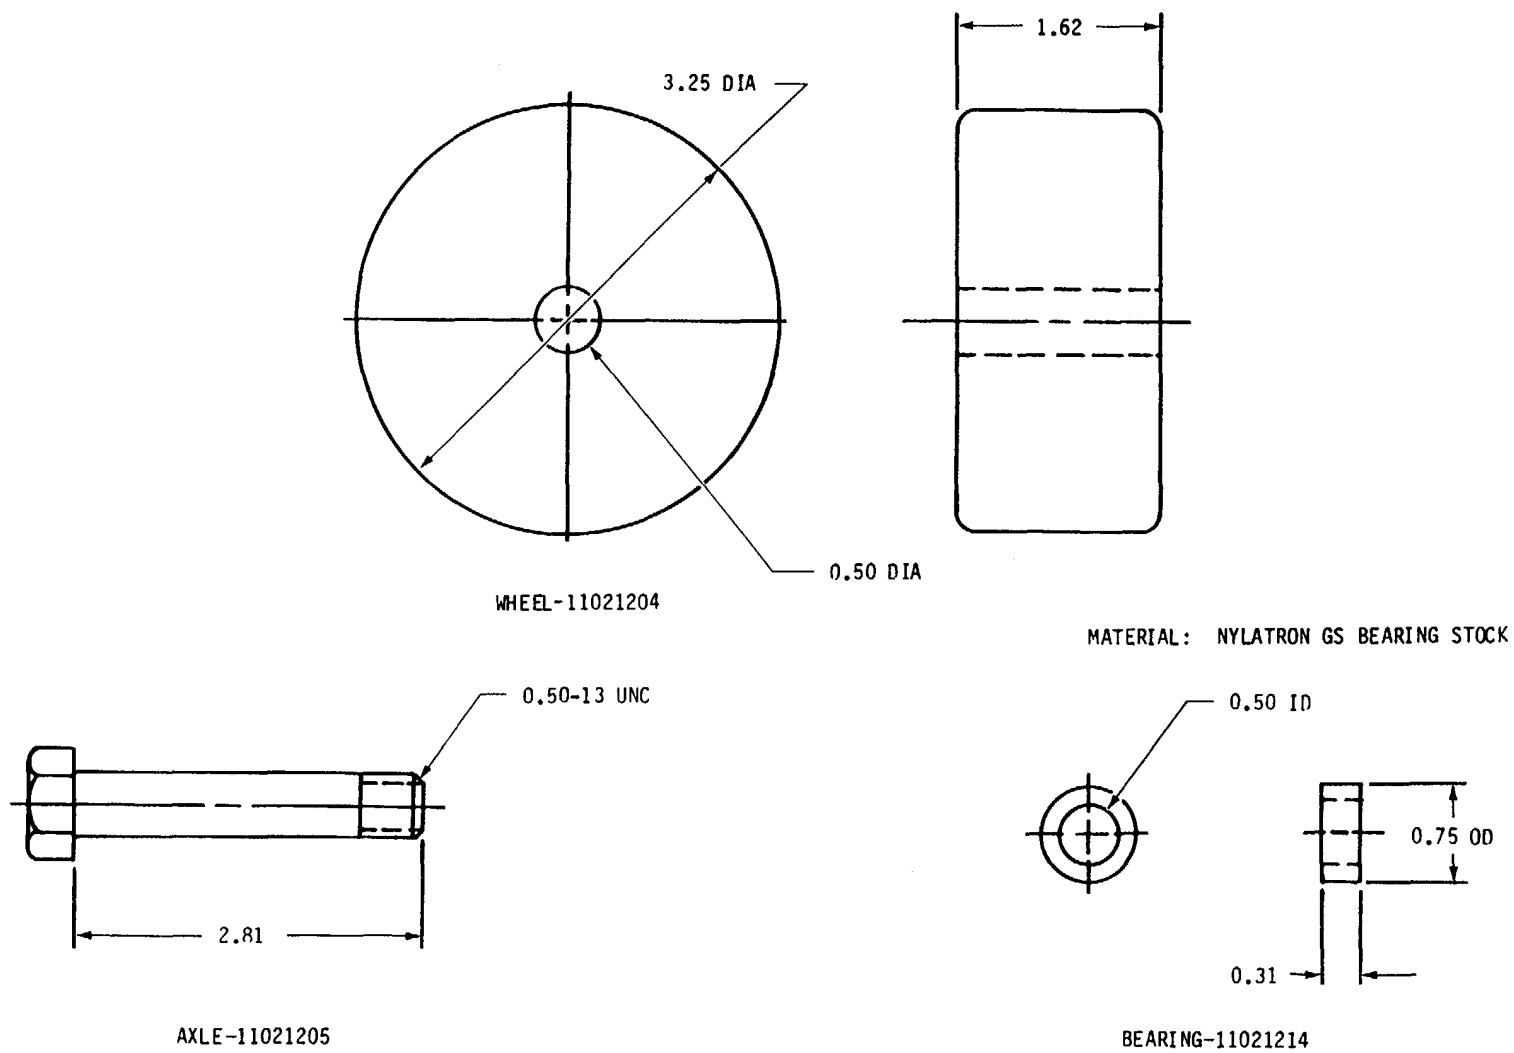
Dimensions for wheel, axle, and bearing, 11021204, 11021205, and 11021214, unit 2, IS0-2-1.
